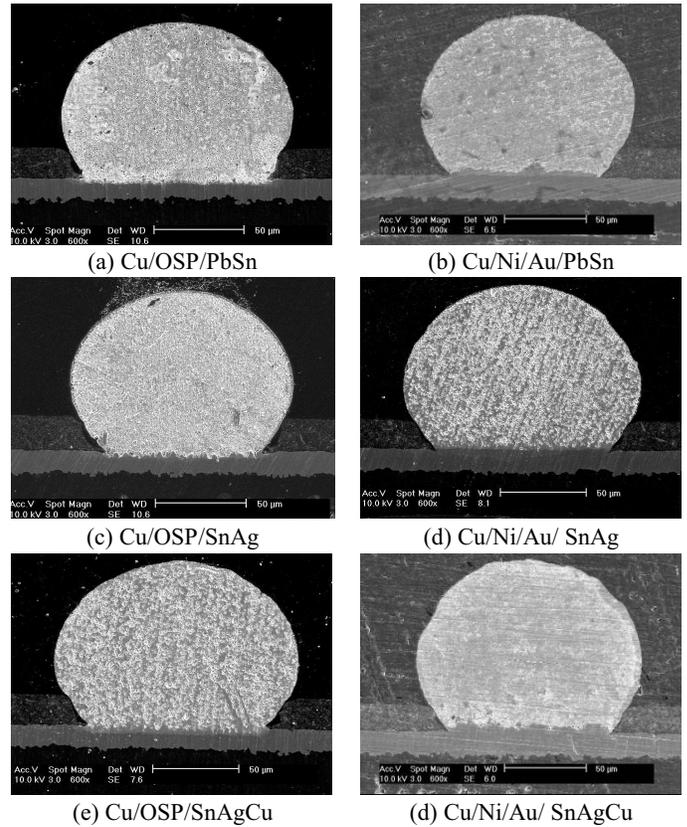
SEM cross-sectional images of Sn-37Pb, Sn-3.5Ag, and Sn-3.8Ag-0.7Cu solder bumps on different PCB surface finishes after one reflow at 210°C and 250°C.
